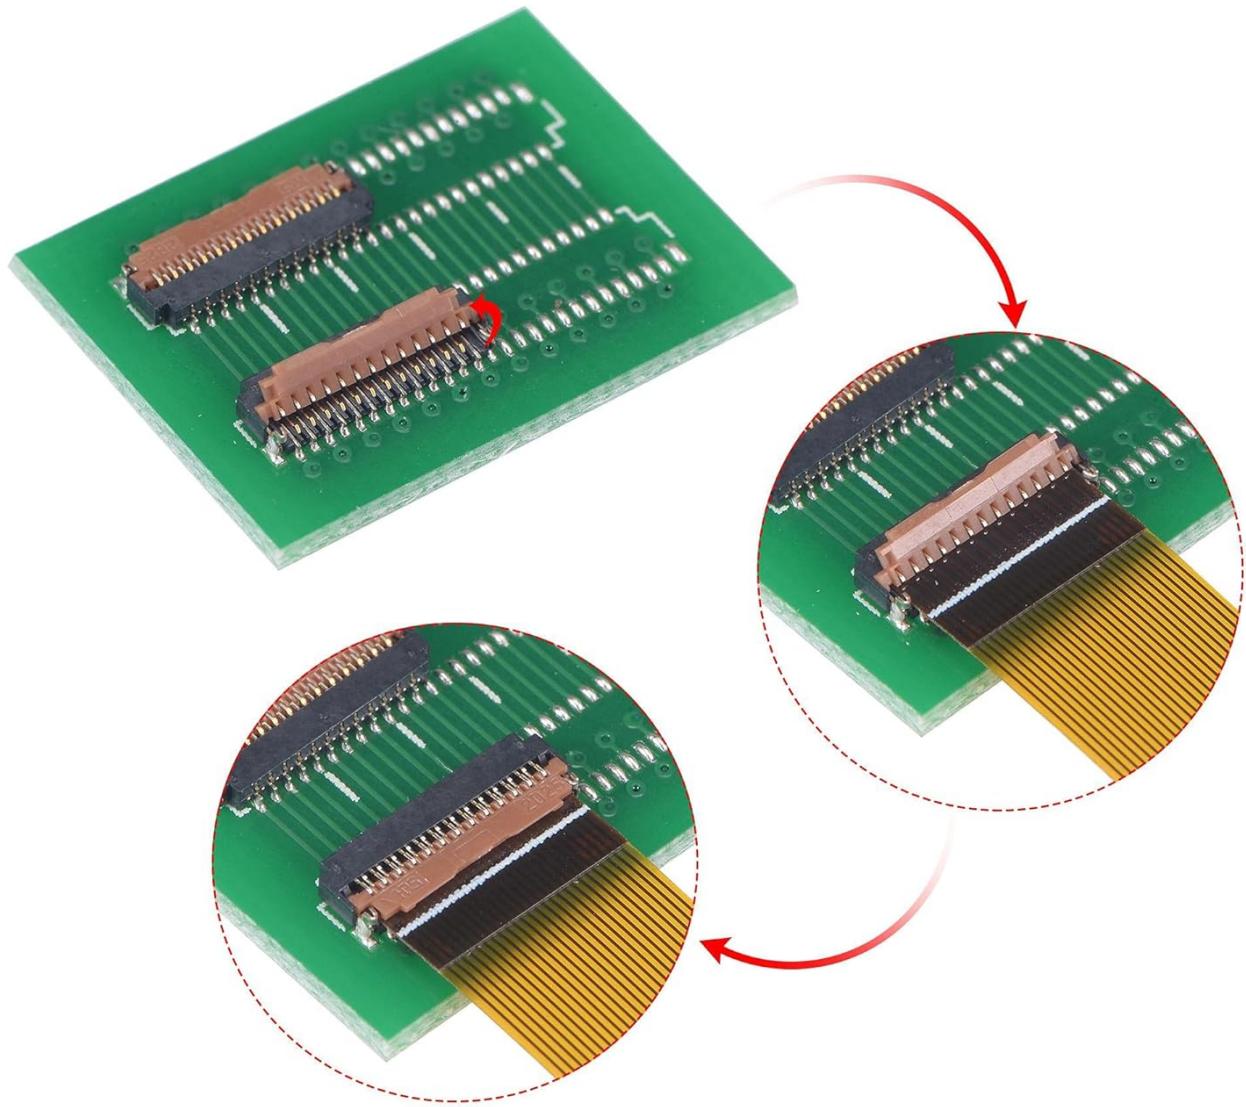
Illustration demonstrating the process of flipping up the connector tab to insert the flexible flat cable.
